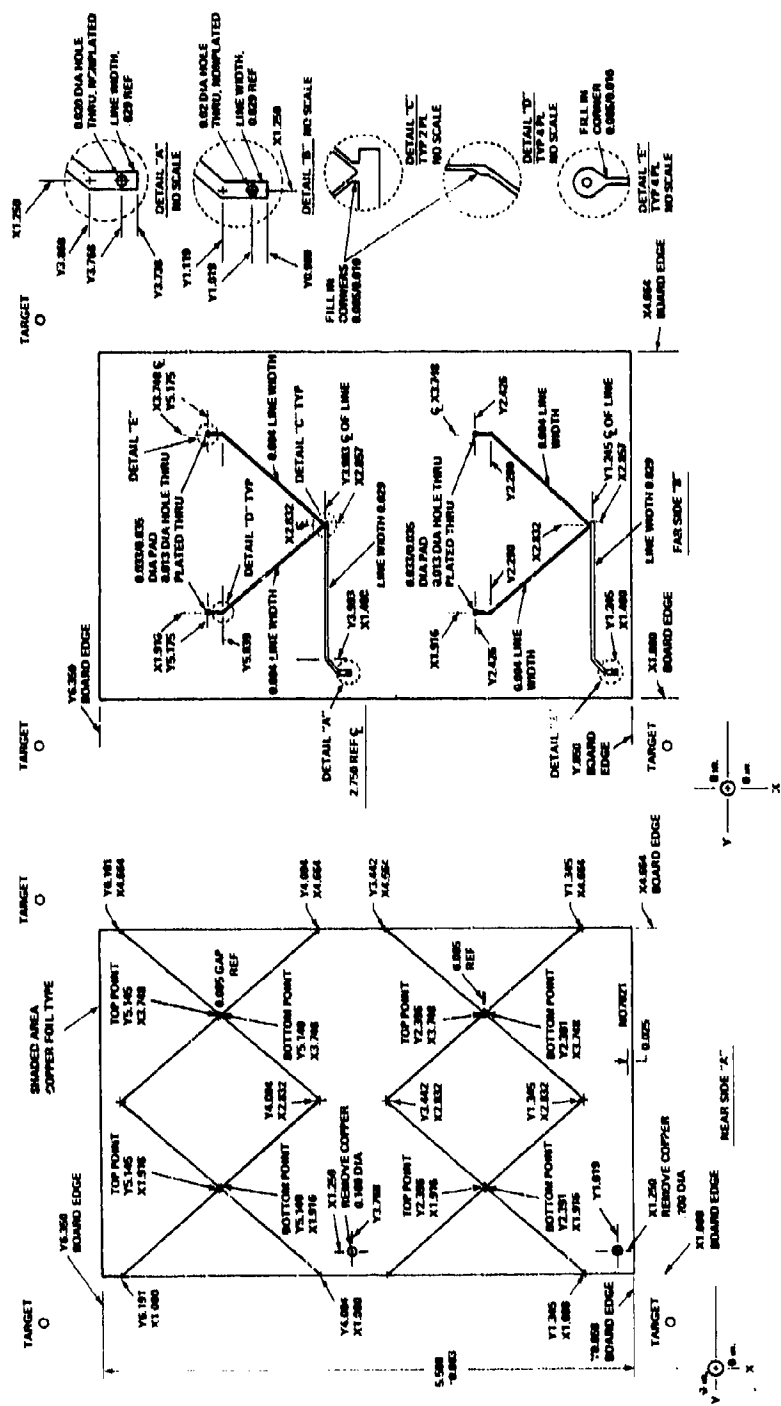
Circuit board drawing of 1.75-in. diameter B dot sensor.
